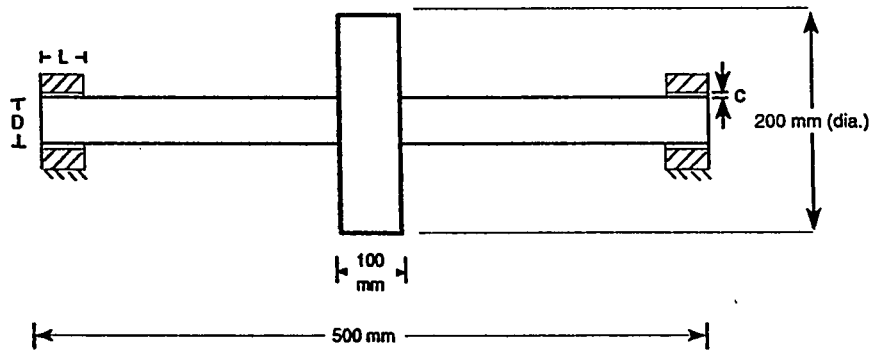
Schematic diagram of a rotor mounted on journal bearings.
